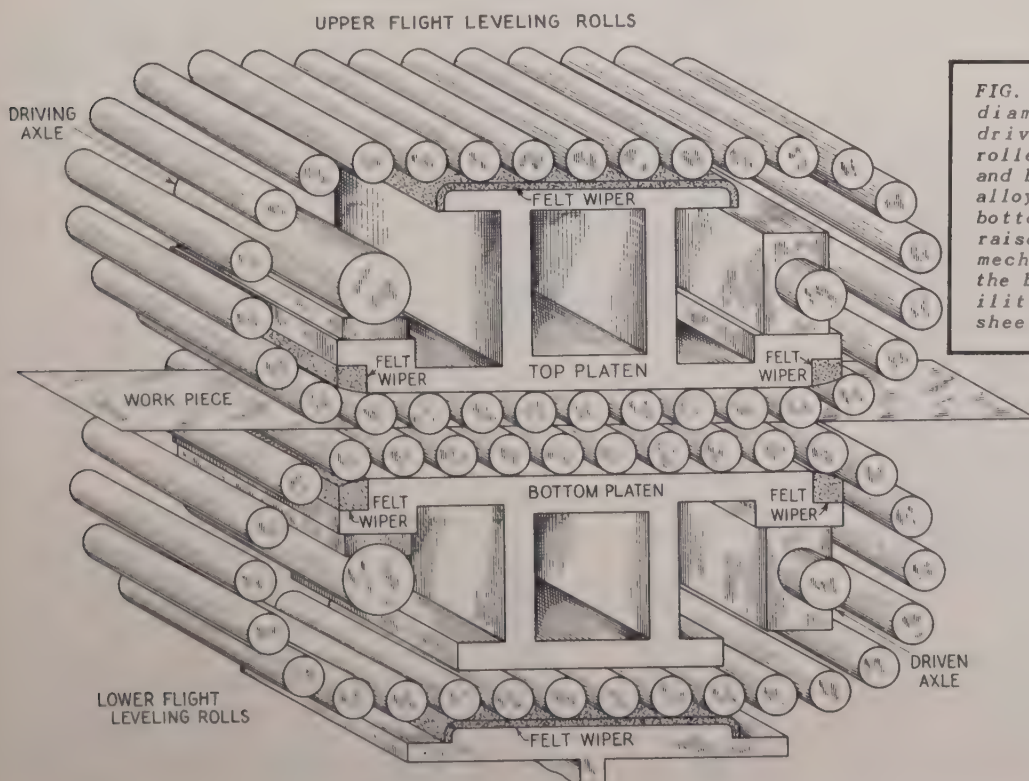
The 1-7/16 in. diam work rolls are driven by an endless roller chain (not shown), and back up by the cast alloy steel platens. The bottom assembly can be raised or lowered, and a mechanism for tilting the bottom assembly facilitates feeding the sheet into the rolls.
